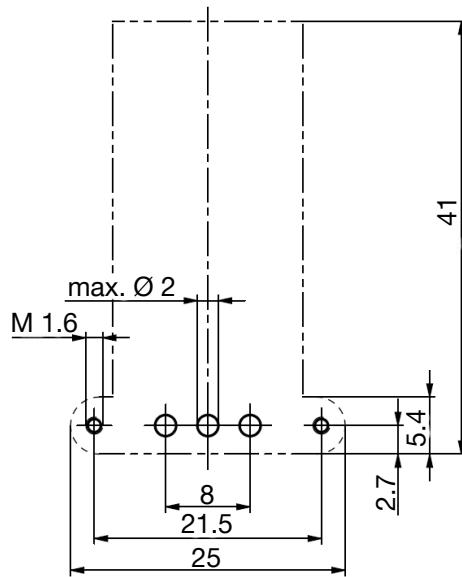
Installation drawing for angle flange FS33 – Hole pattern
